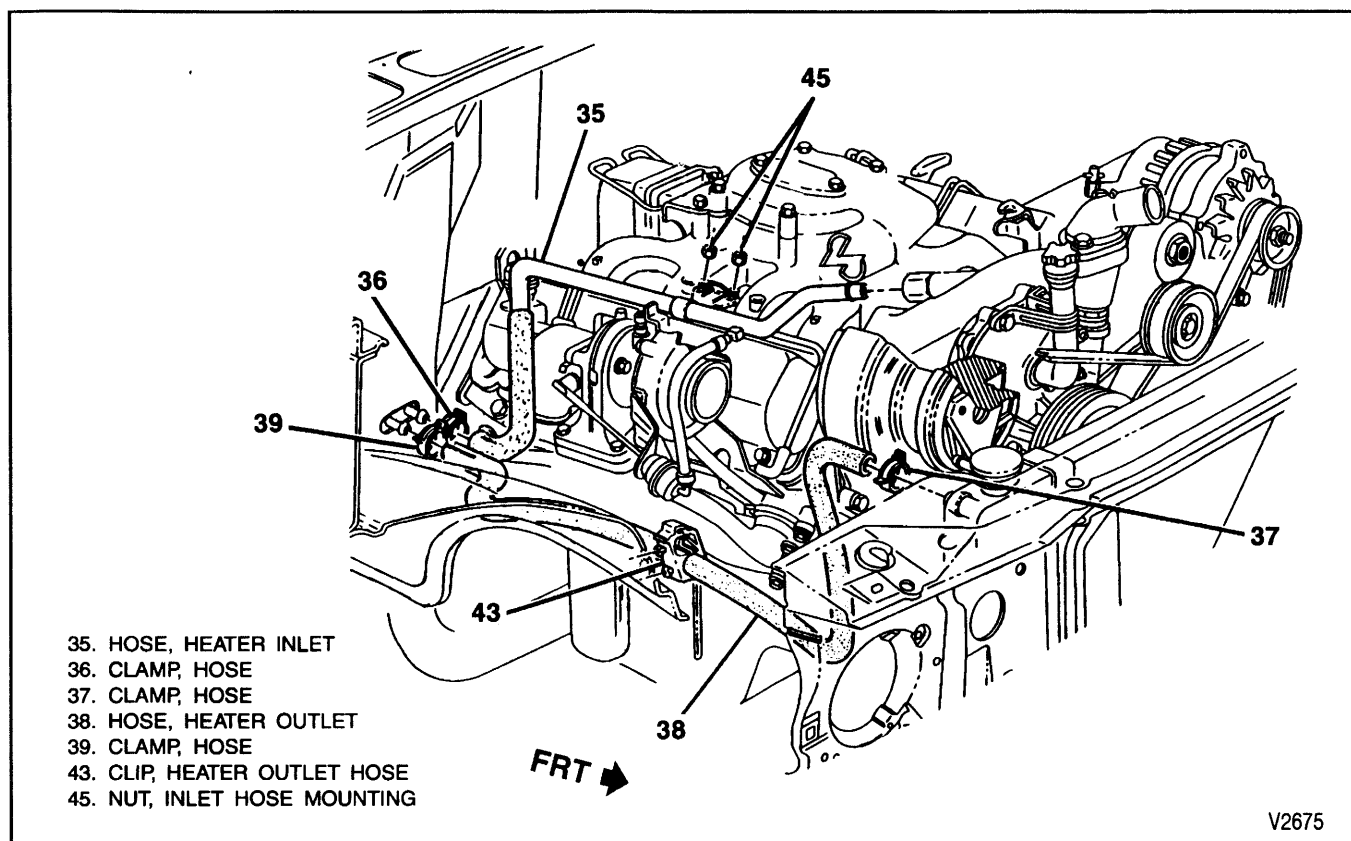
Heater Hose Routing (6.5L Diesel Engines)
